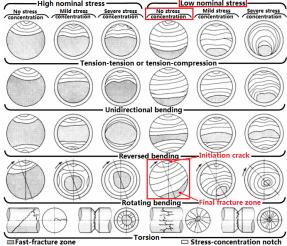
Schematic representation of fatigue fracture surface marks in shafts [18].
